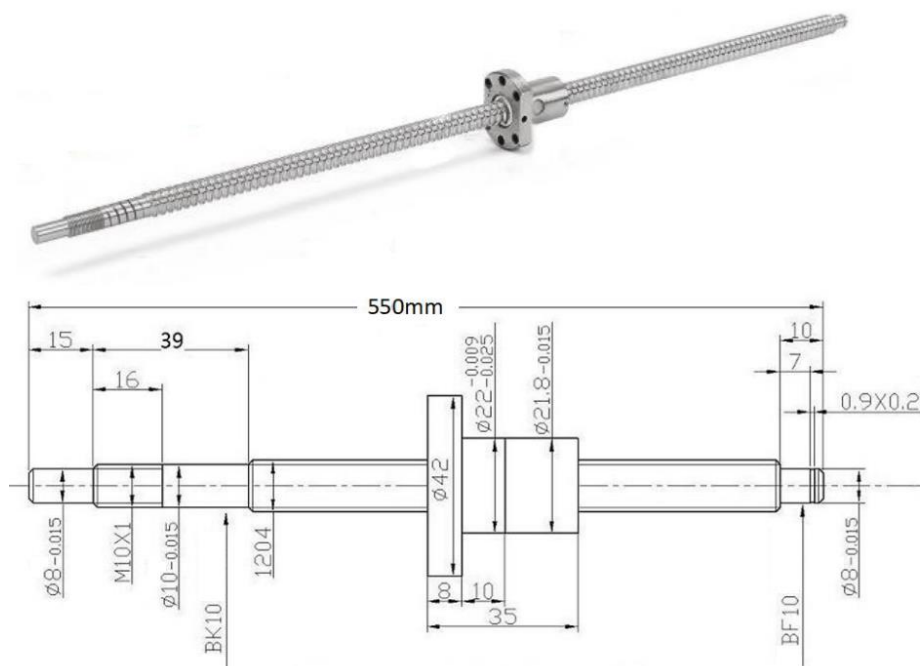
2D drawing with dimensions of the SFU1204 550mm ball screw and nut (Handson Technology 2006).
